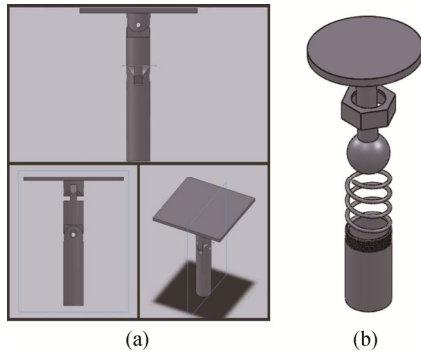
(a) Bolted universal joint and (b) spherical universal joint
